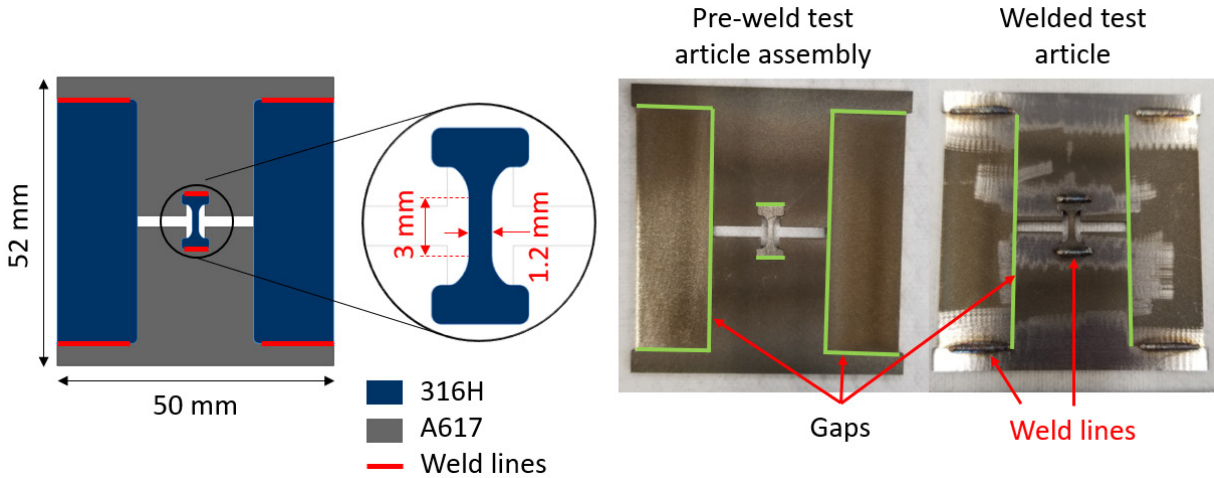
Version 2 of the WFSTA design showing the dimensions and geometry with different materials, pre-weld test article assembly, and welded test article.
